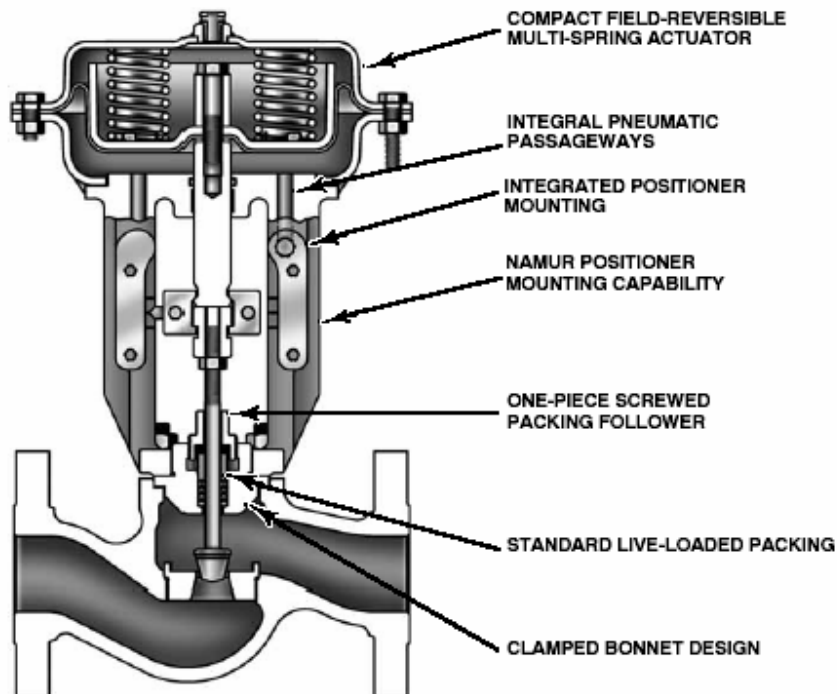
Design ST Control Valve Assembly with Stem-Guided Contoured Plug (Size DN 25/1-Inch)
